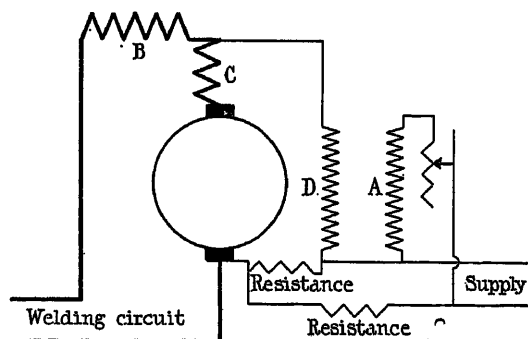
Connections of Westinghouse (American) welder.
